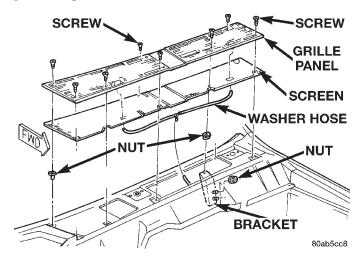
Cowl Plenum Cover/Grille Panel Remove/ Install
